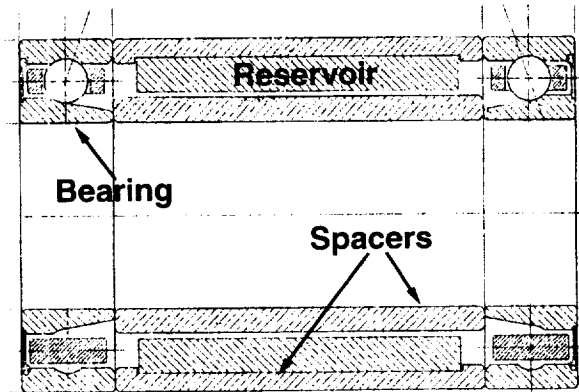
AMSU-A2 Bearing Assembly (actual size)
